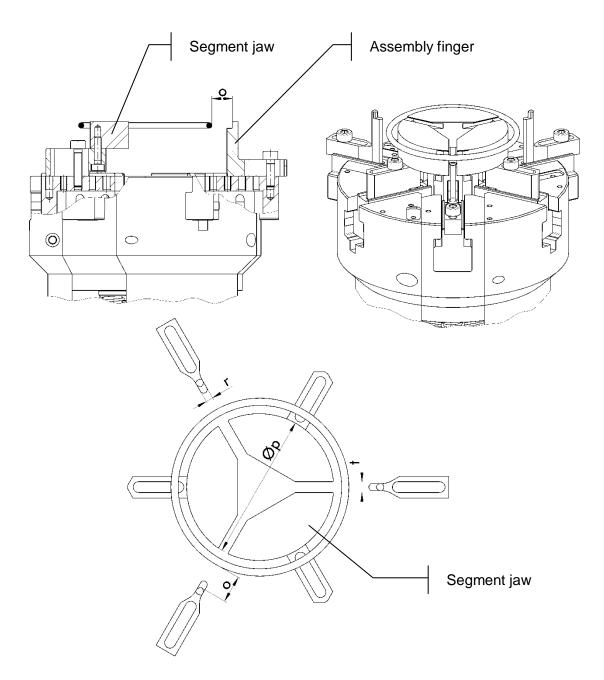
Internal assembly IM\_1.3 Figure B, without transfer point
